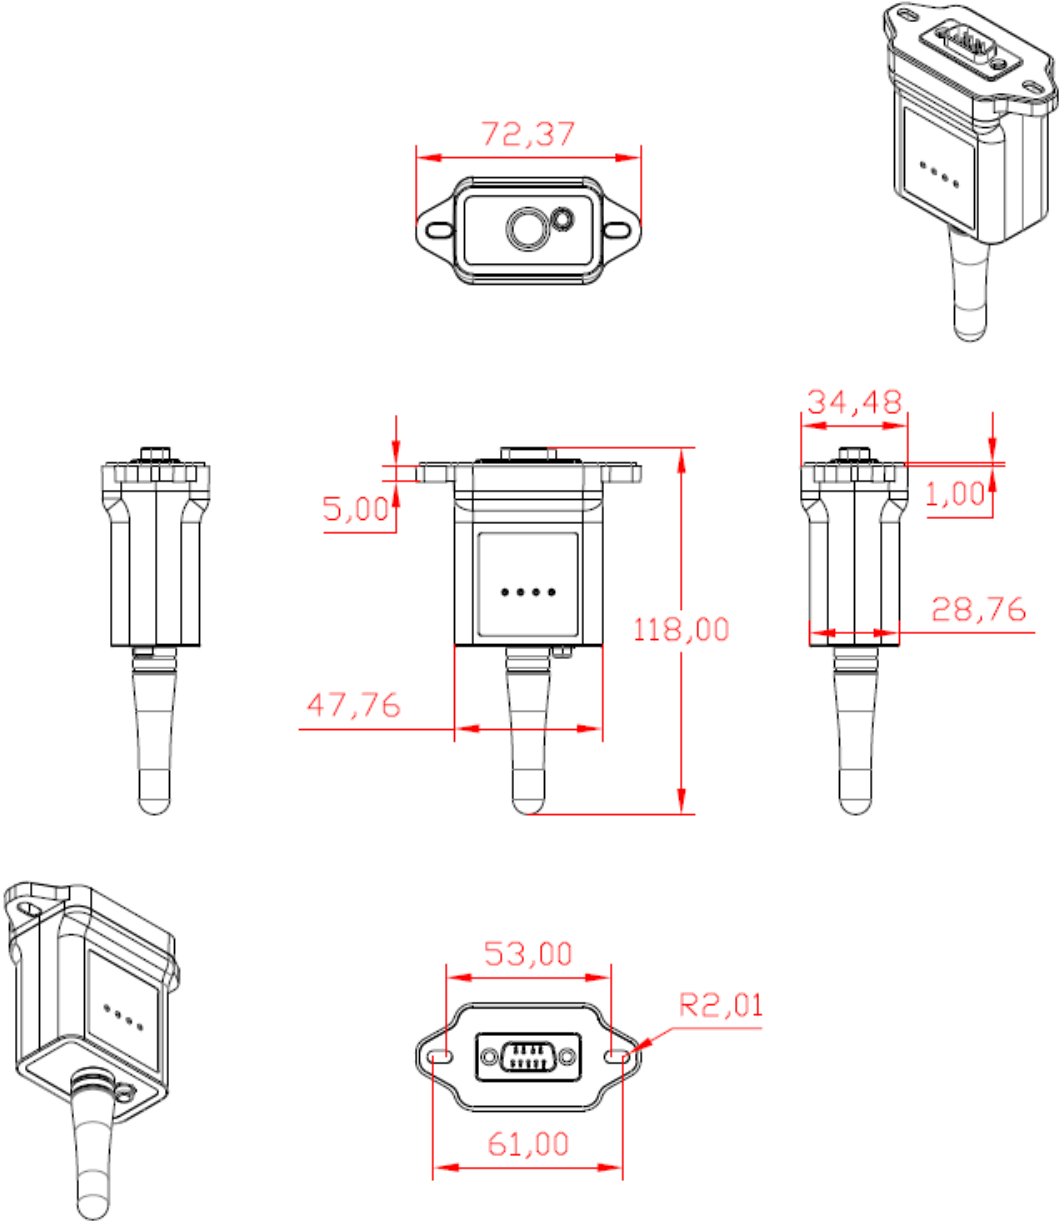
Solar Plug-SWB1-13 Mechanical Dimensions
